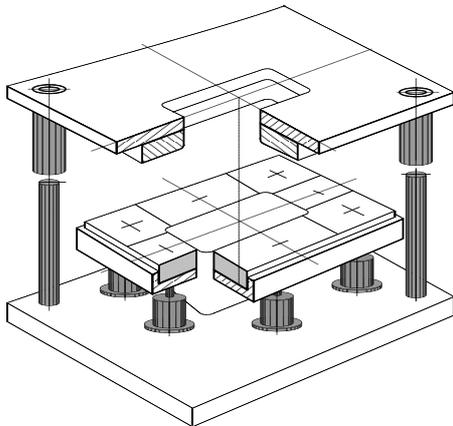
Die with segmented blank-holder, [12] rectangular parts application
